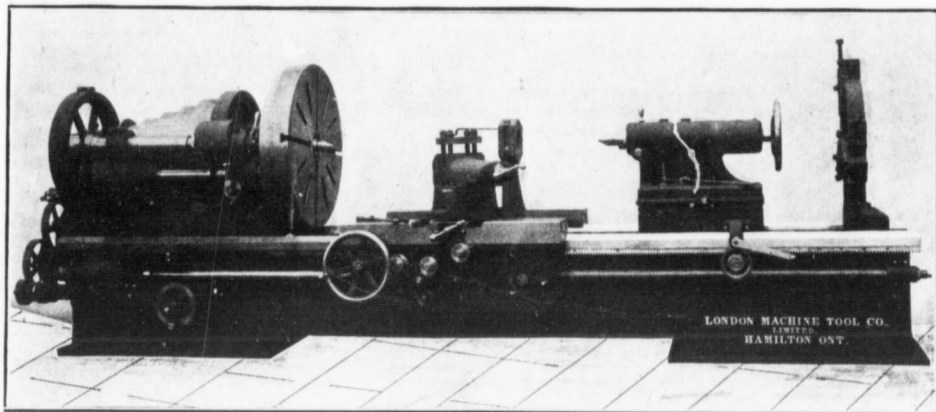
New Style London Machine Tool Triple Geared Lathe.
